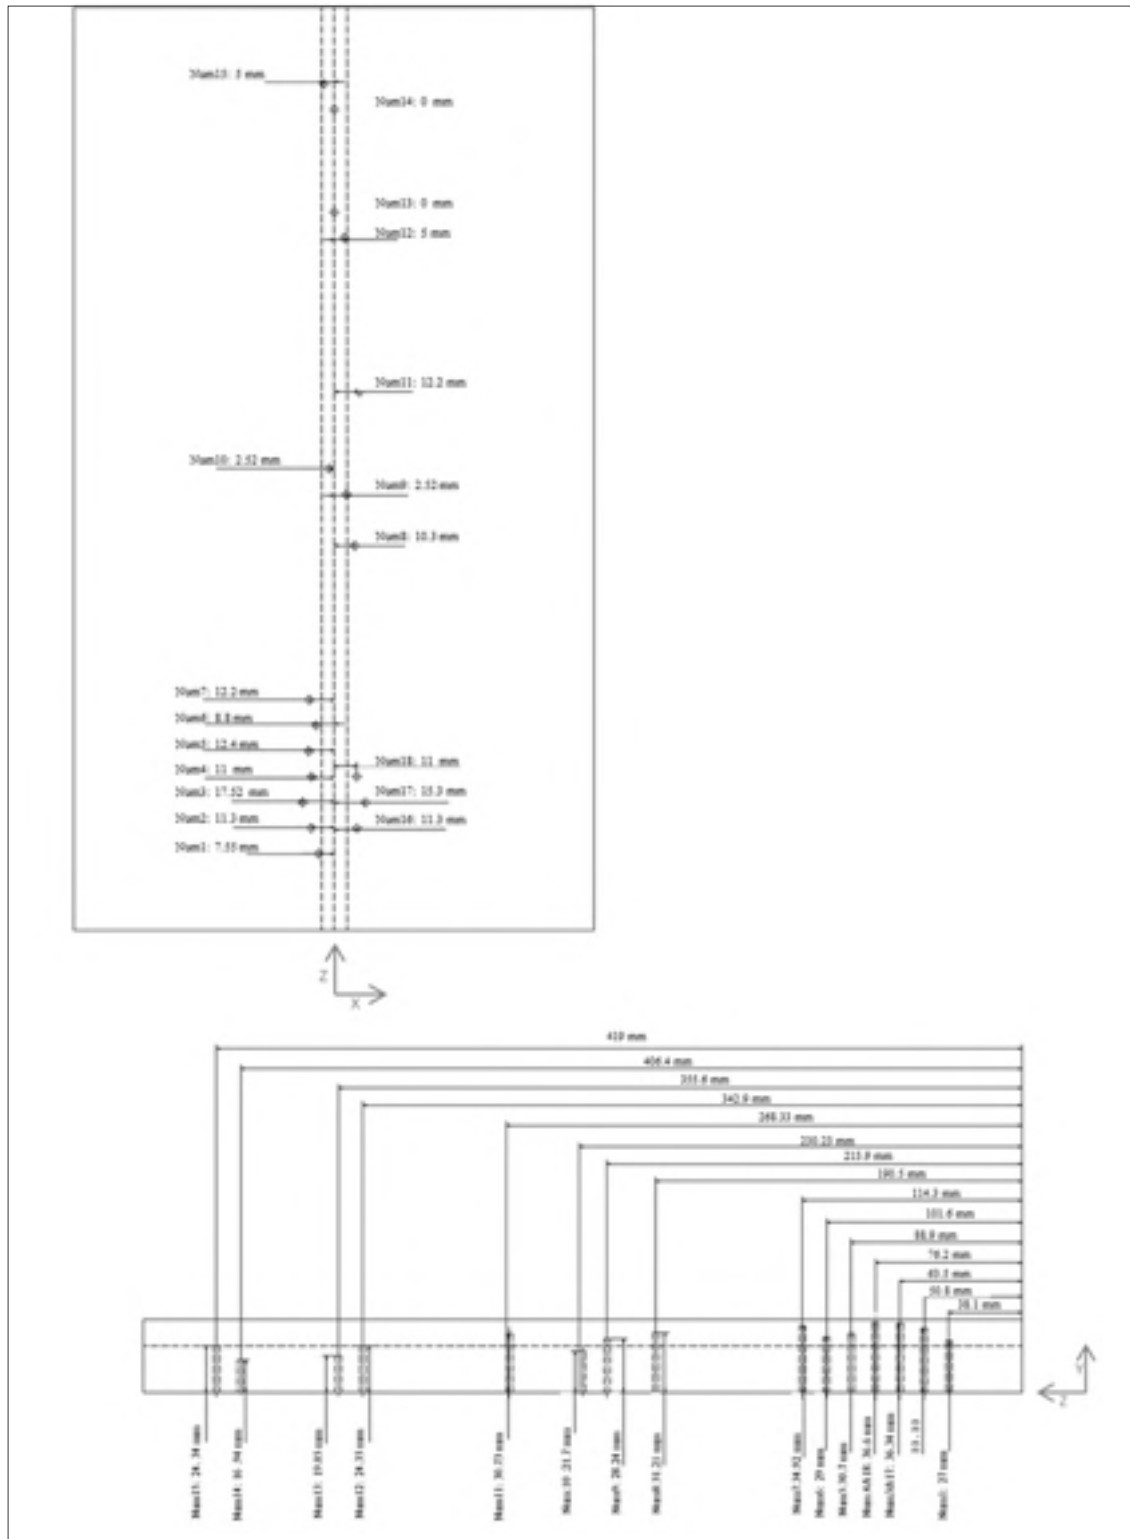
Drawing for machining, indicating the position of thermocouples on the plate
